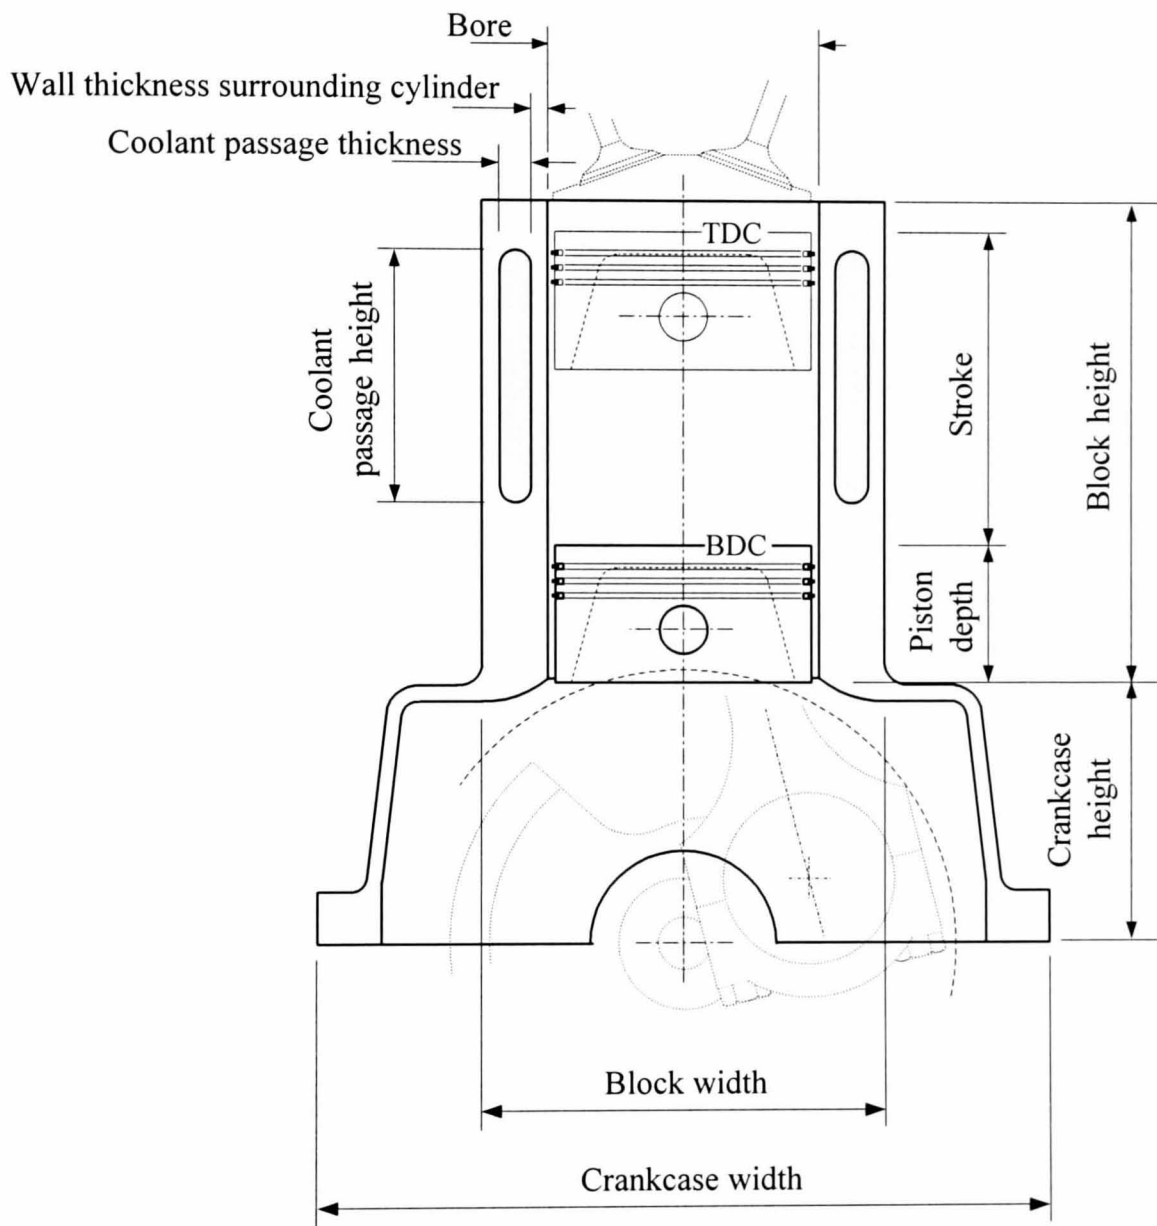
Section view through the block, showing some of the key dimensions in determining the block shape and size.
